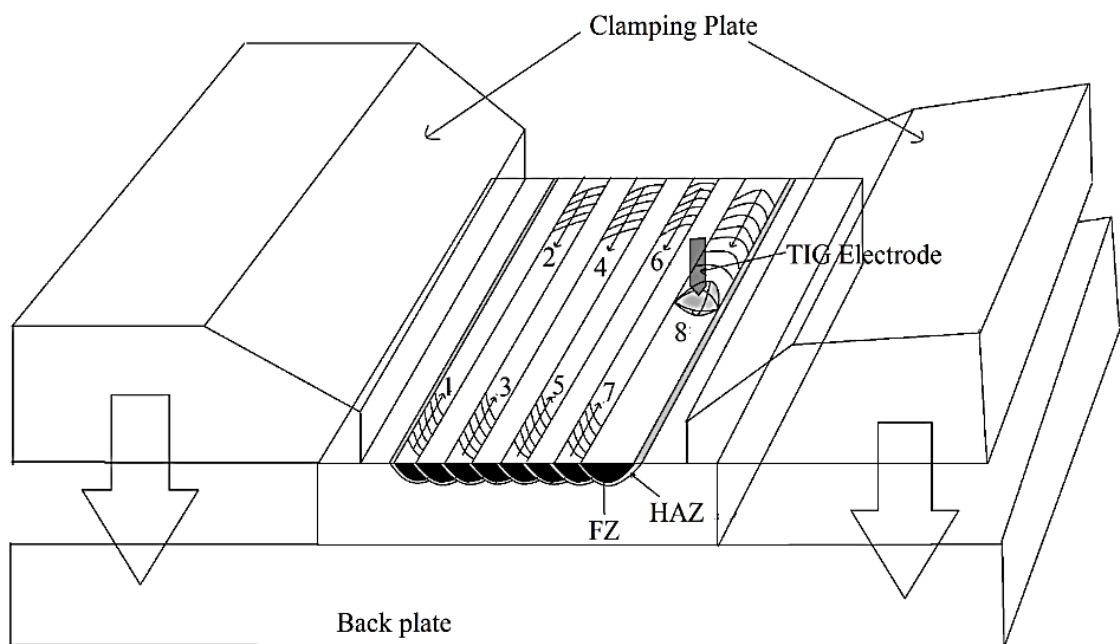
Schematic diagram of fixture and work piece for surface modification by TIG arcing process.
